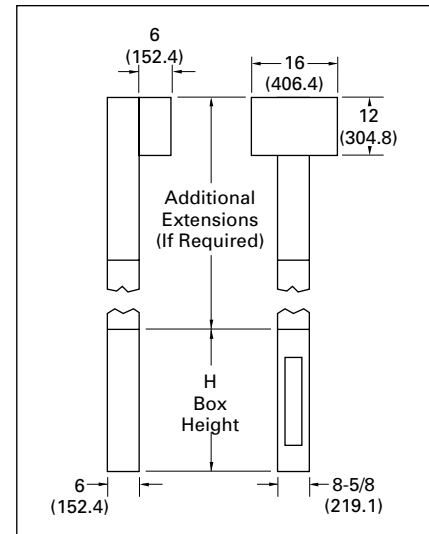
PRL2a-LX Trough Extension, Dimensions in Inches (mm)
